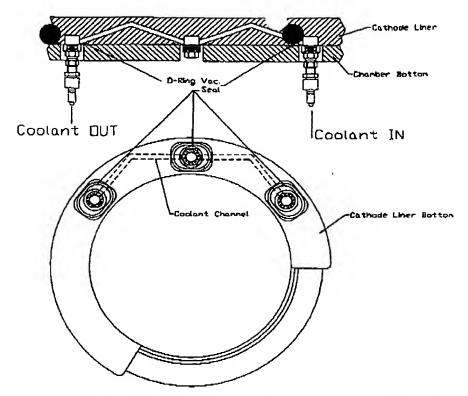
Cathode Liner's coolant channels and vacuum O-Ring seals located at the bottom of the chamber. Notice there are no braze or welded joints in the vacuum chamber.
